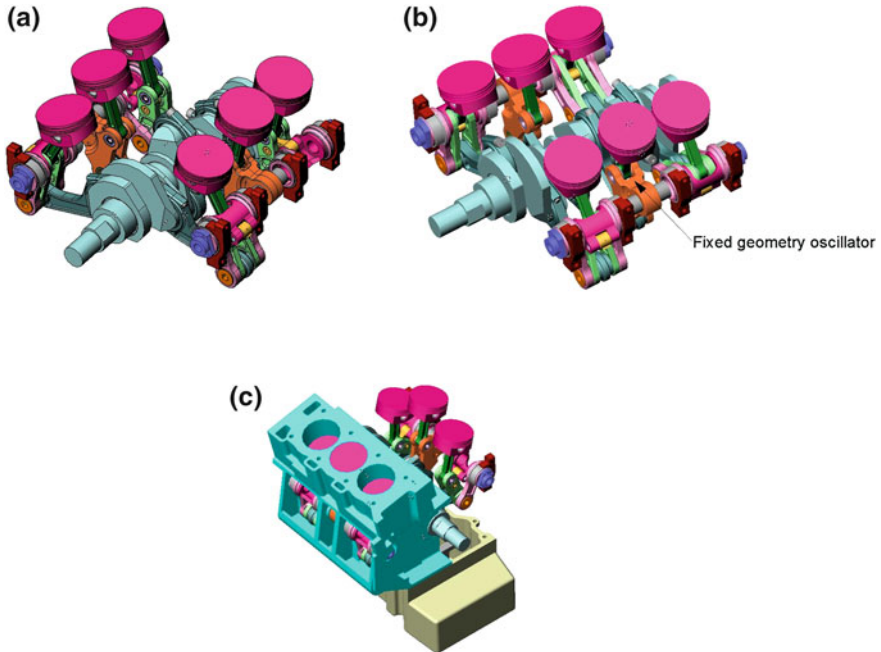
a V6 engine with front two pistons deactivated, b V6 engine with front two and back two pistons deactivated, c complete V6 assembly
